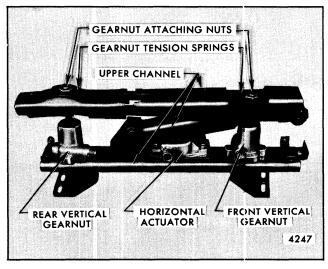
Six-Way Seat Adjuster - "B, C and E" Styles
